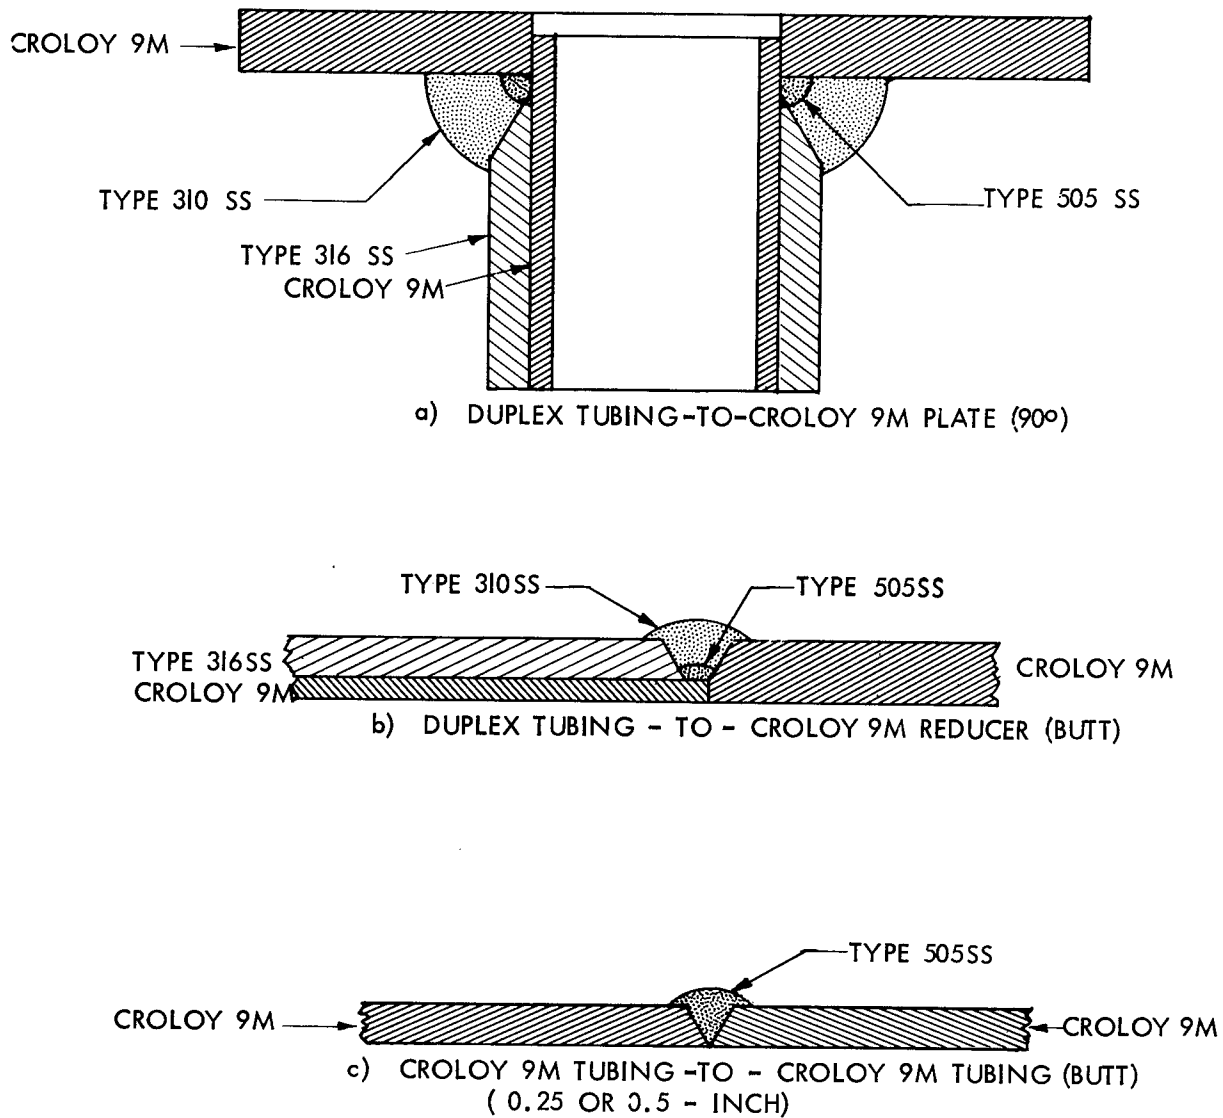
SCHEMATIC OF VARIOUS TYPES OF WELD JOINTS
